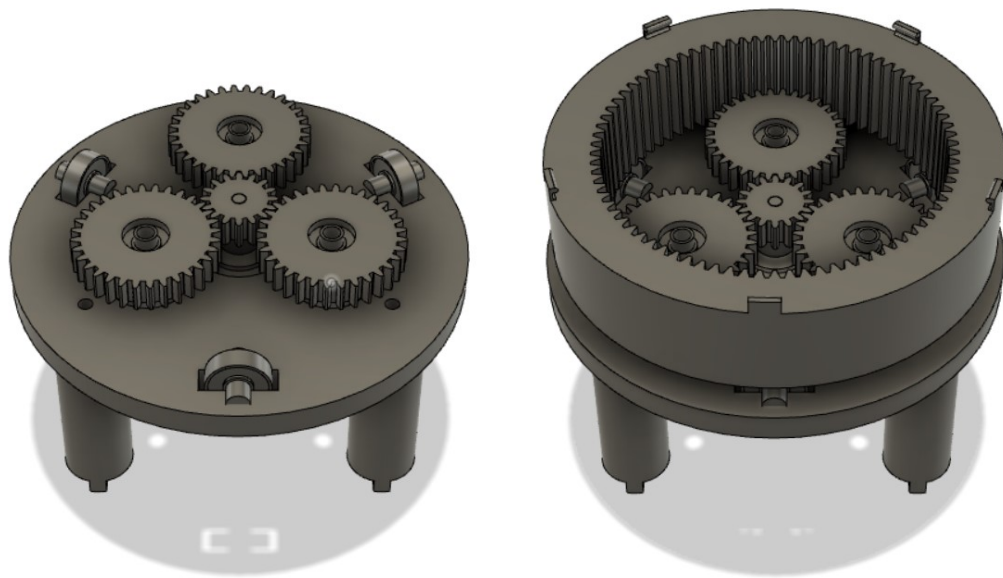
Turntable design. Left: Exposed turntable without ring gear. Right: Turntable with ring gear
